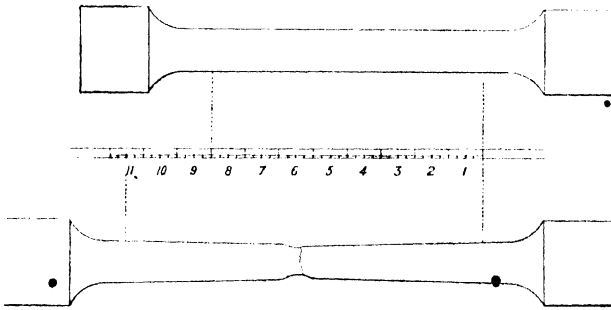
Appearance of test piece before and after fracture. (Wrought iron.)
